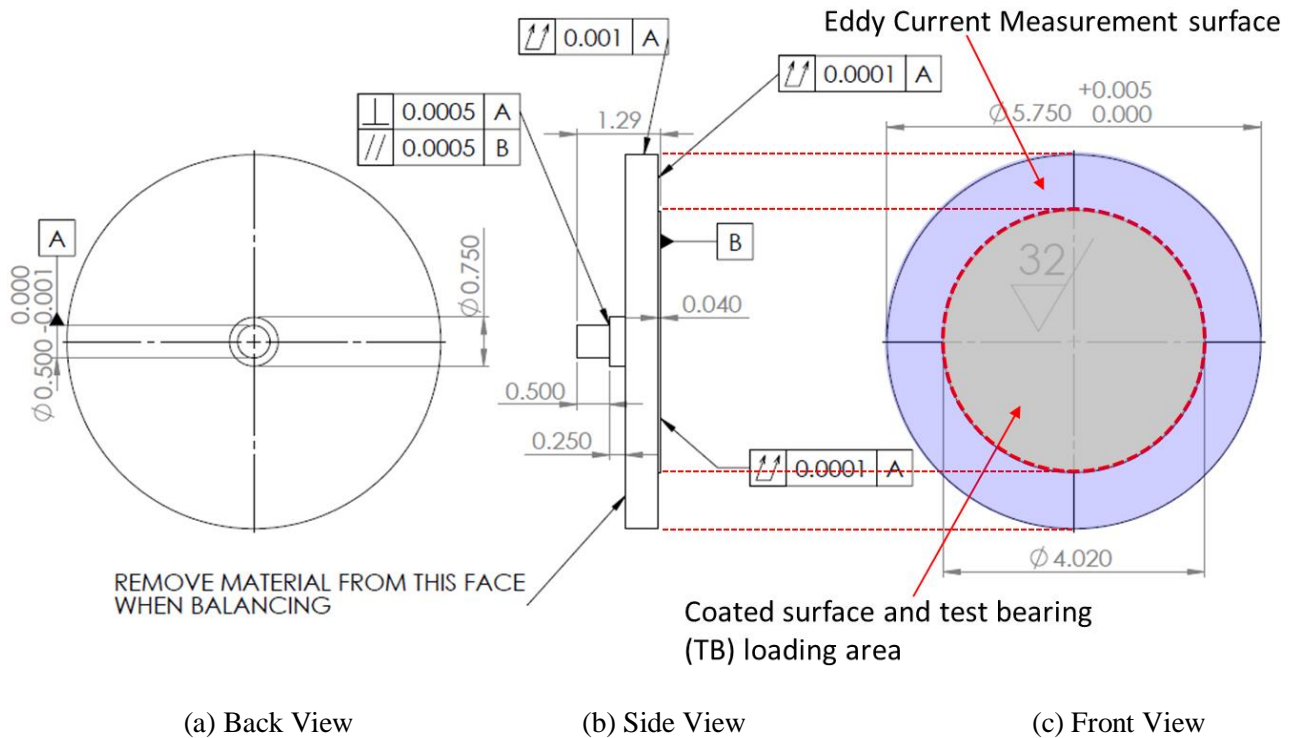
Dimensional drawings of 4140 steel thrust collar for a gas bearing test rig (dimensions in inches).
